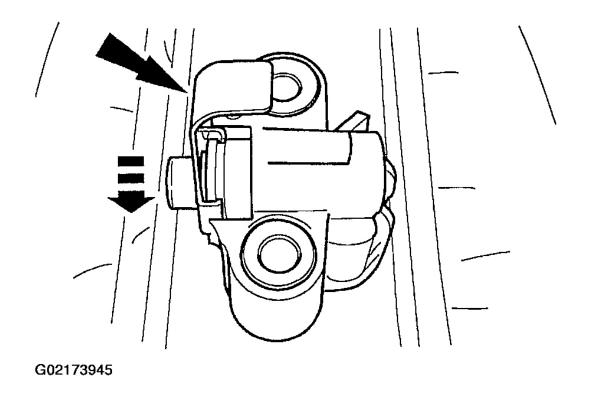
Pushing Ratchet Arm Back Into Tensioner Housing Courtesy of FORD MOTOR CO.
